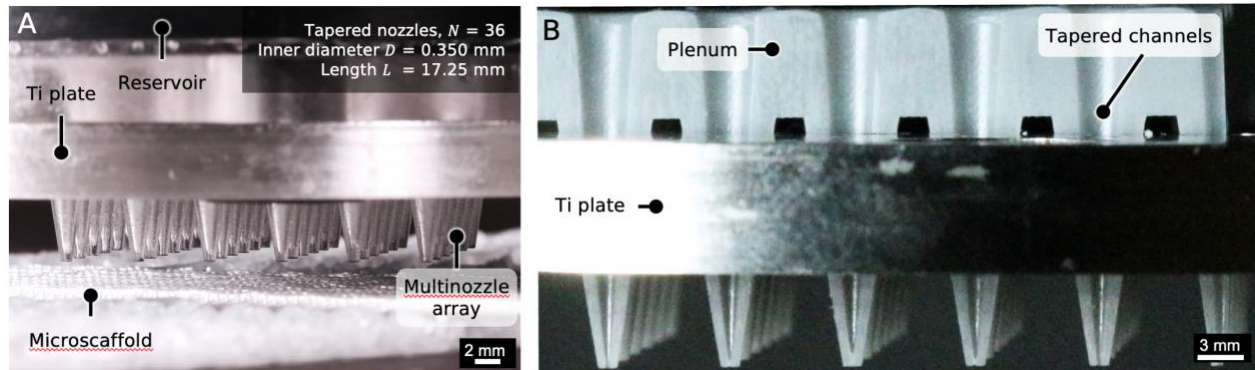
Retained printhead assembly and fabrication strategy. (a) Close-up of the final outlet region mounted at the end of the reservoir, showing the SLA-fabricated multinozzle array and the titanium backing plate above a microscaffold printed with the final 36-nozzle architecture. (b) Cross-sectional view of a sectioned SLA array assembled with the backing plate, showing the tapered channels fully defined within the printed component. The figure highlights the separation between the replaceable SLA-defined flow path and the reusable metallic structural support.
